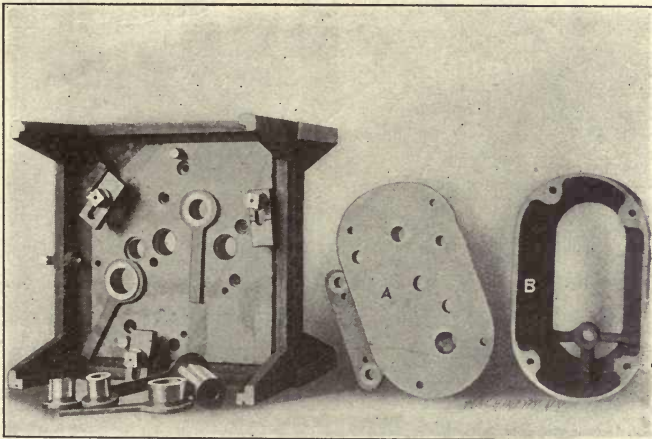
Drill Jig Used for Drilling Work shown to the Right
